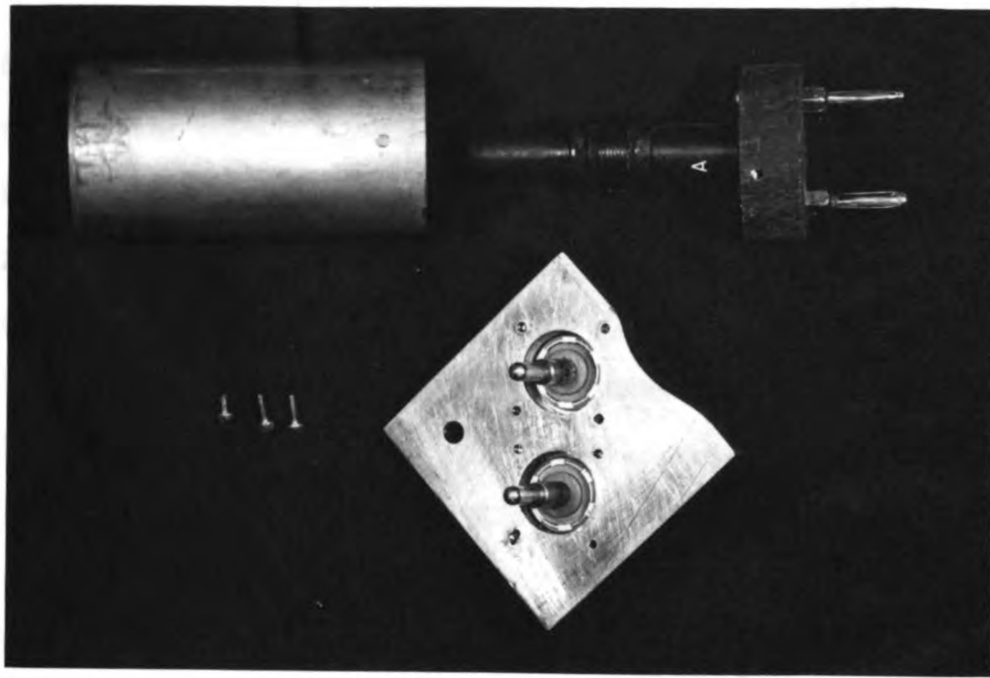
(A) COIL ASSEMBLY, (B) BASE
